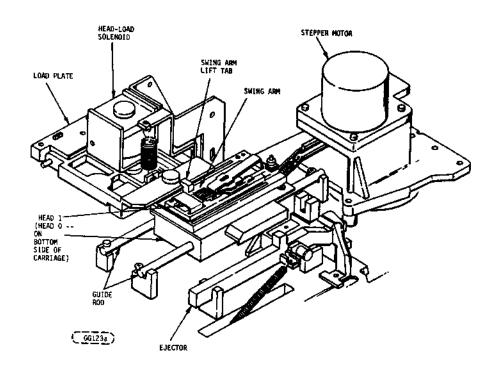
HEAD-LOAD CARRIAGE AND STEPPER MOTOR DETAILS
